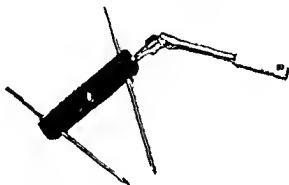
Universal external adjusting assembly for locking pins into pin bars
